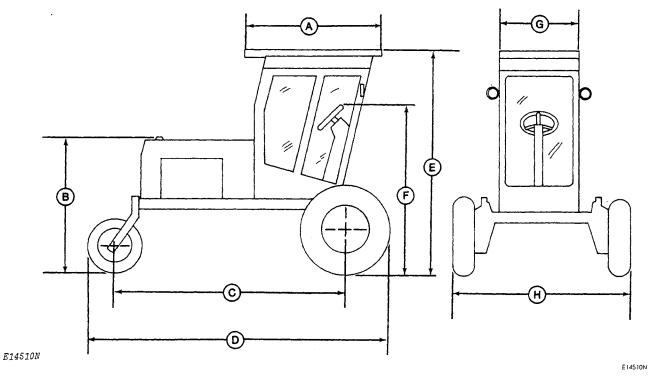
Dimensions of 2280 Hydrostatic Drive Windrower
